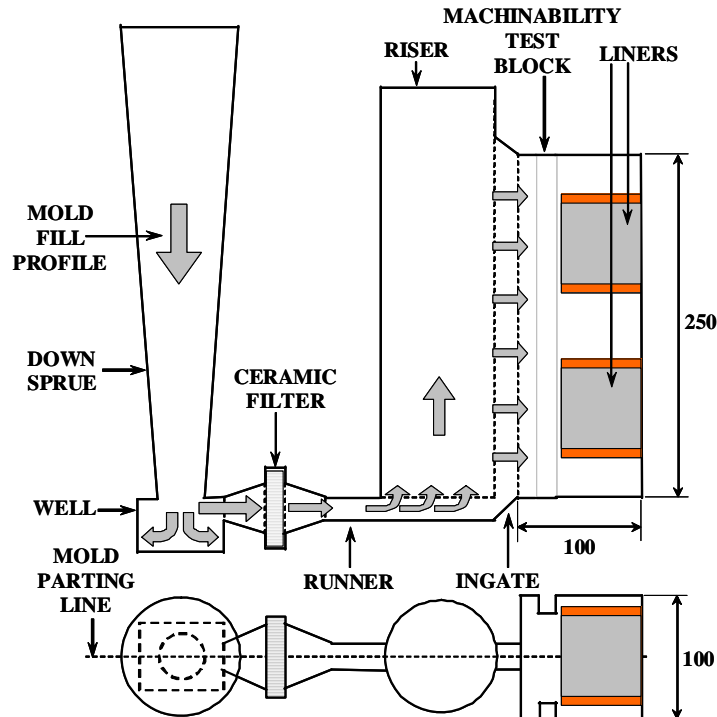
A schematic diagram of the MTB casting showing the implementation of the different liner types in the MTB assembly. MTB dimensions are in millimeters.
